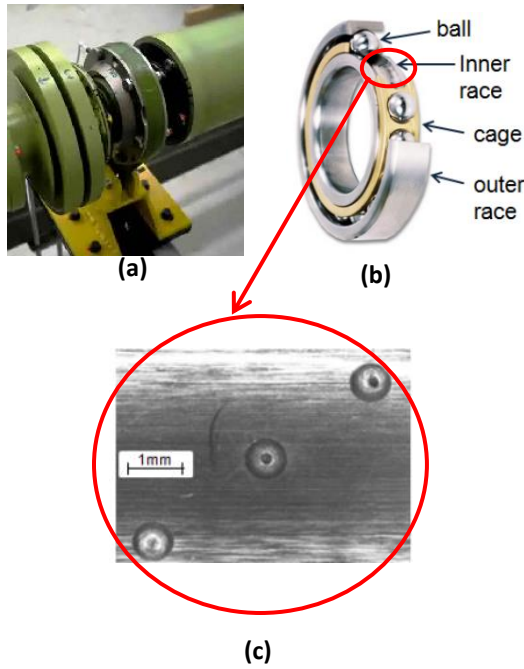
Faulted FHB: (a) assembled bearing in the drive train, (b) schematic of assembly components, and (c) zoom-in view of the spalled inner-race fault
